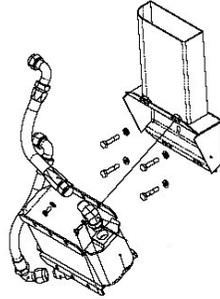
Exploded View of Engine Oil Cooler Installation
